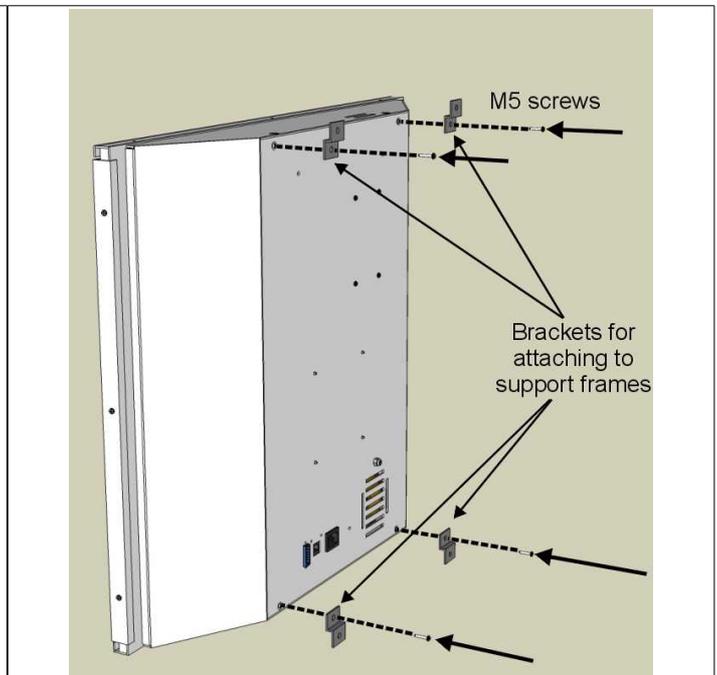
Brackets used for attaching FS-24s-1 models to support frames or wall
